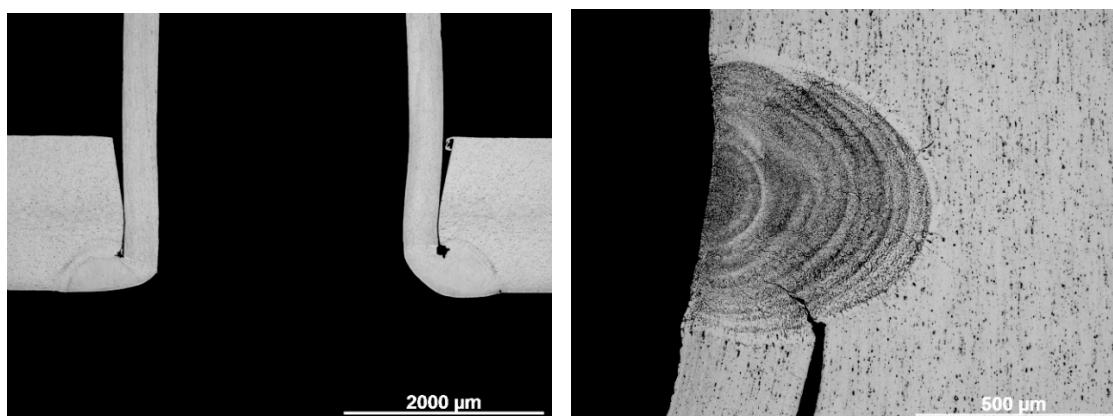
Metallographic cross-sections of a) tube-to-hat weld and b) closure weld made using EBW.
